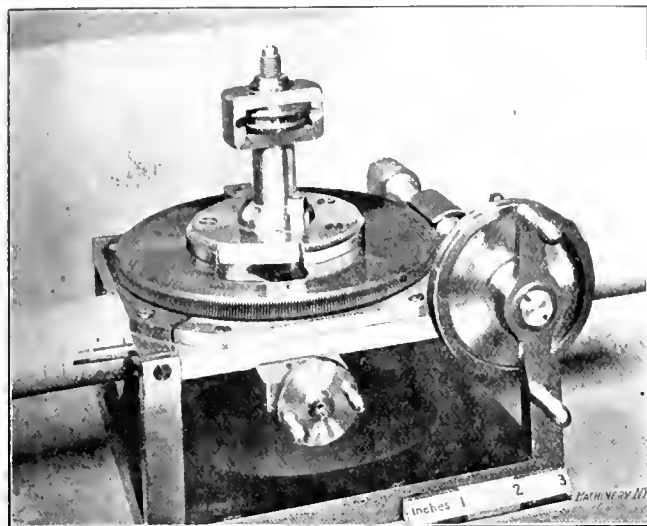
Maudslay's Machine for Originating Screws (About 1800)
